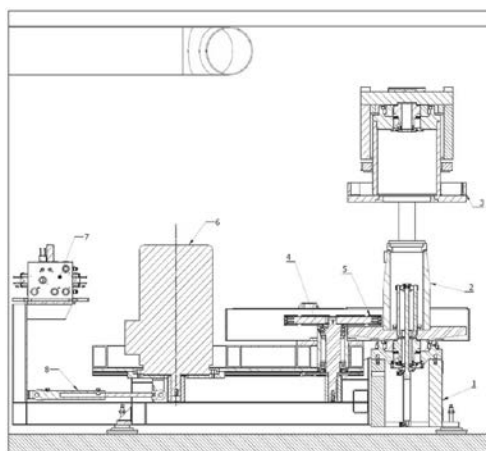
Machine for mechanical tire recycling ; 1-body, 2-table with an arbor , 3-press bed, 4-spindle , 5-millig disk , 6-motor , 7- hydraulic block, 8-press actuator (Holka&Wełnowski, 2012)
